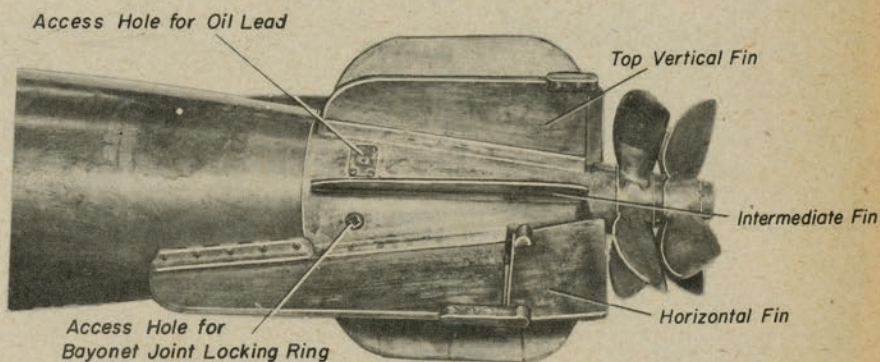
Torpedo Type 91 Mod 3, Tail Section
